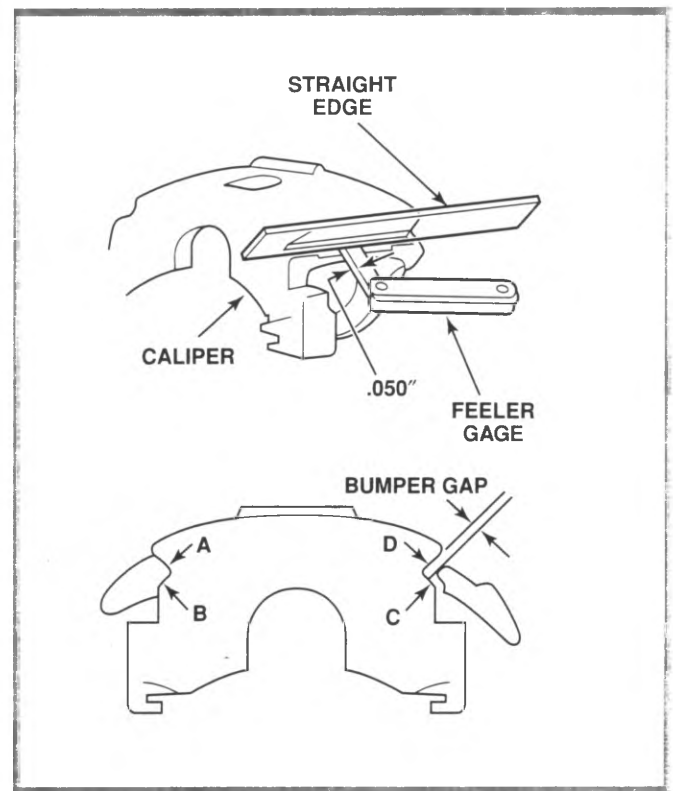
, Bendix® Caliper Wear Adjustment
